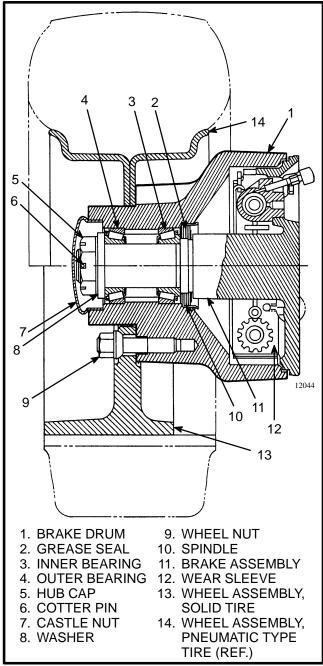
WHEEL AND BEARING ASSEMBLY
